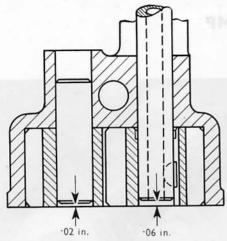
Section showing the assembled position of the driving spindle relative to its impeller, and the driven spindle relative to the body cover face
